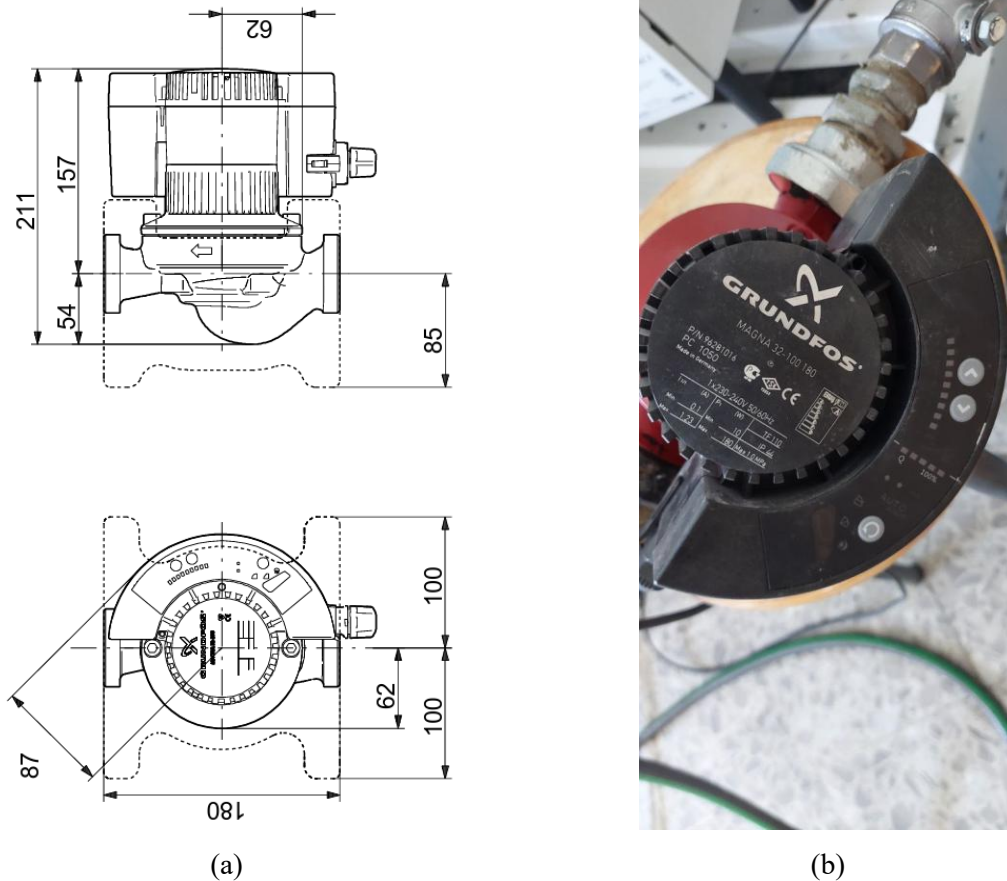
Dimensions of Coolant Pump (a), Coolant Pump of Test Rig (b)
